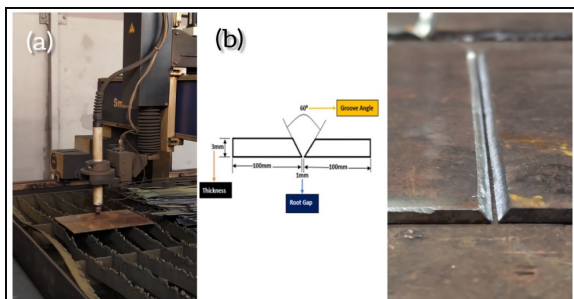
Sample Preparation for Welding (a) Laser Cutting (b) V-groove Preparation.
